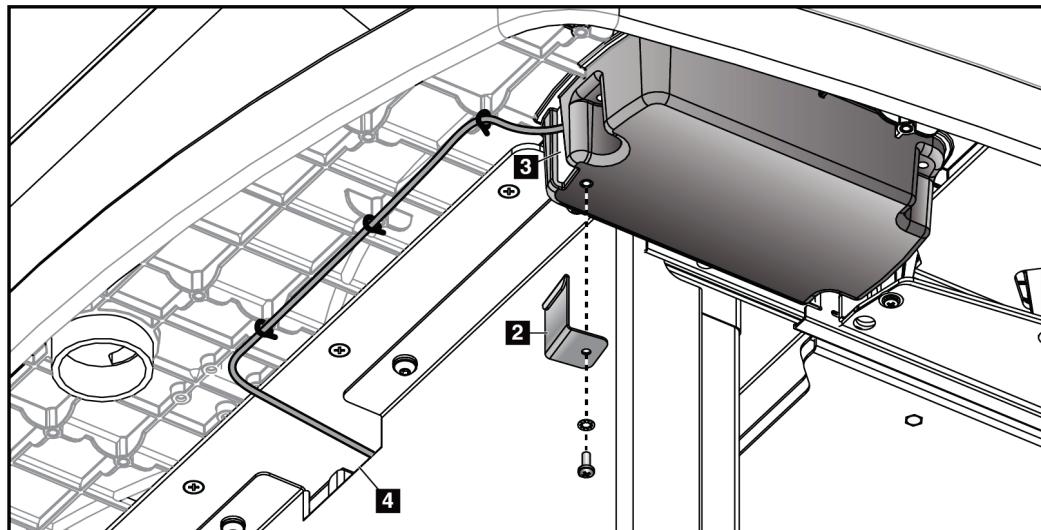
Routing/Removing cables of assembly housing under the workstation tabletop
